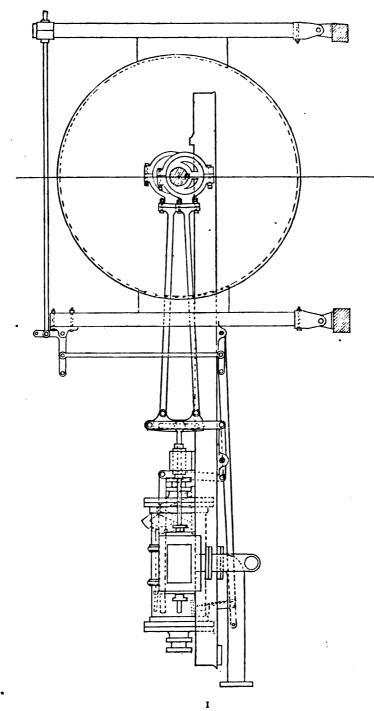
Elevation of Direct Winding Engine shown in Fig. 50.
